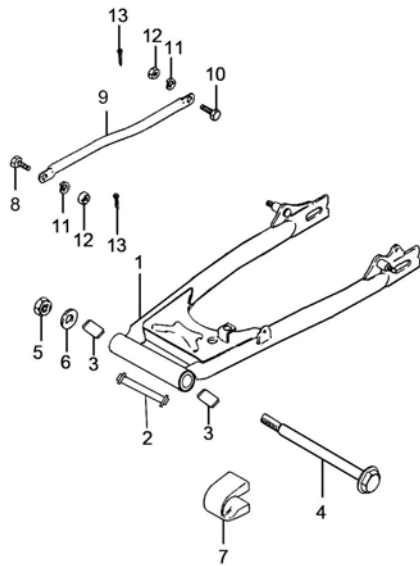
REAR SWINGING ARM (P03-S440-0008)
